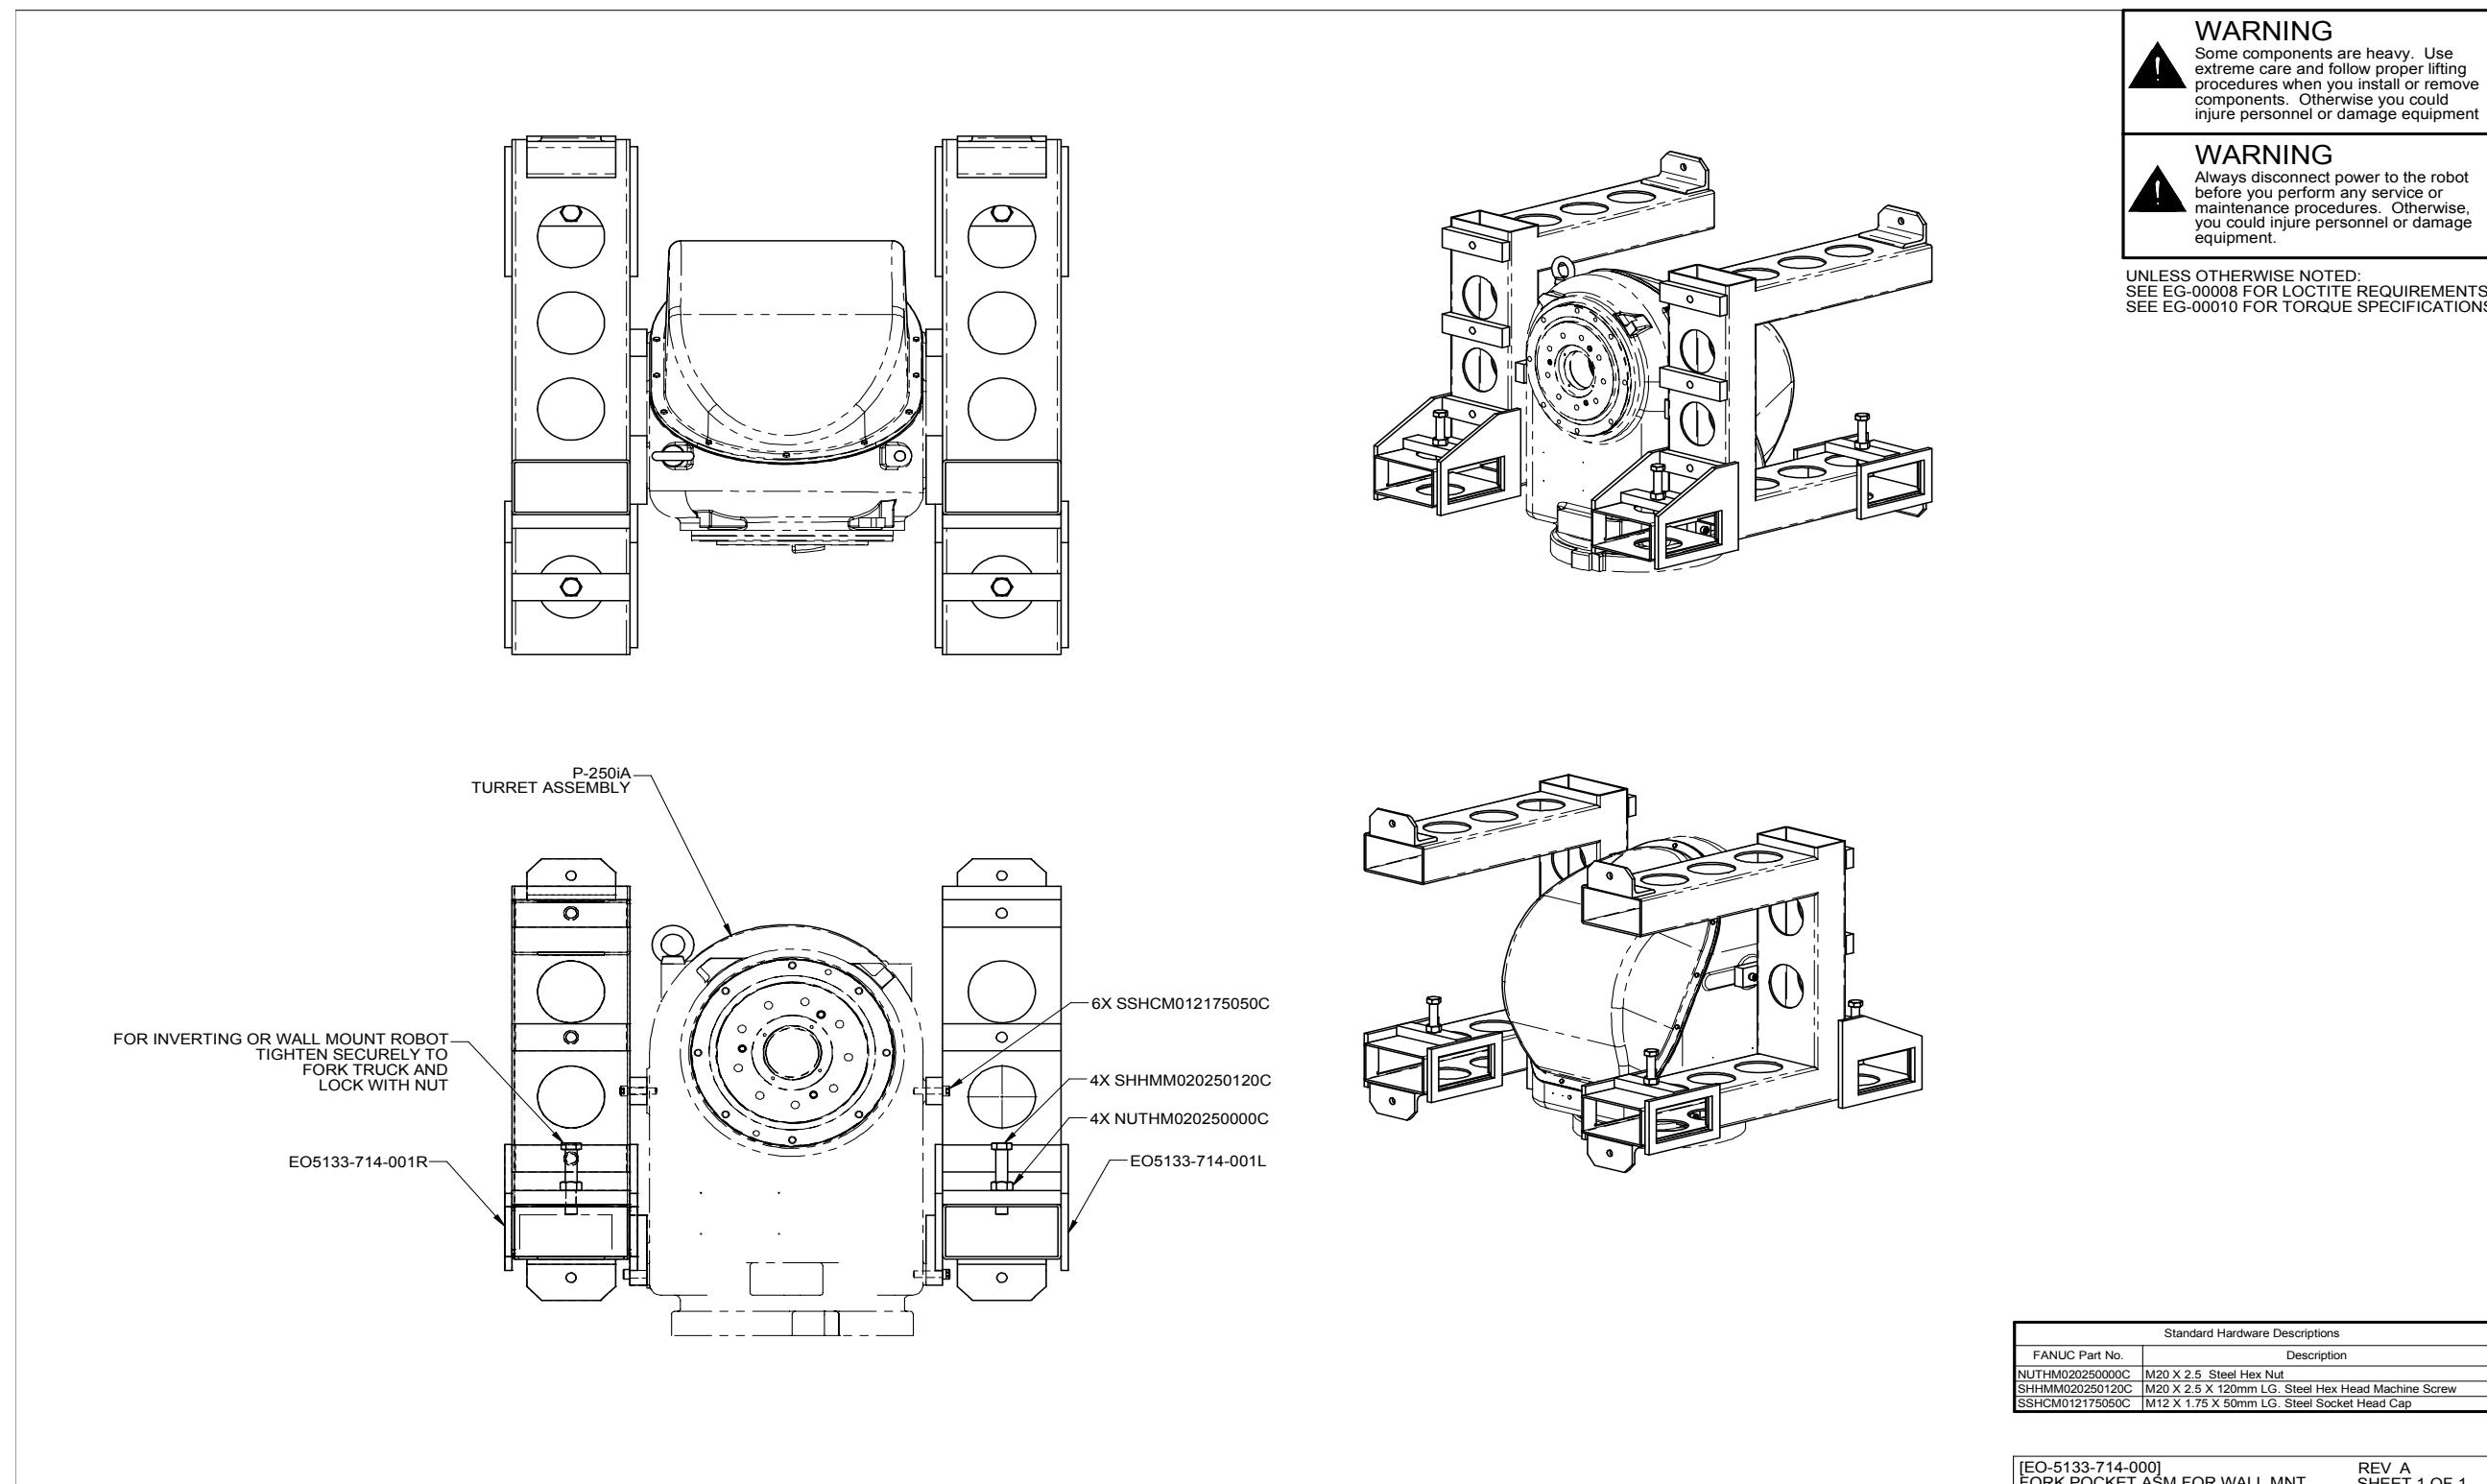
EO-5133-710-000, FORK POCKET ASSEMBLY
